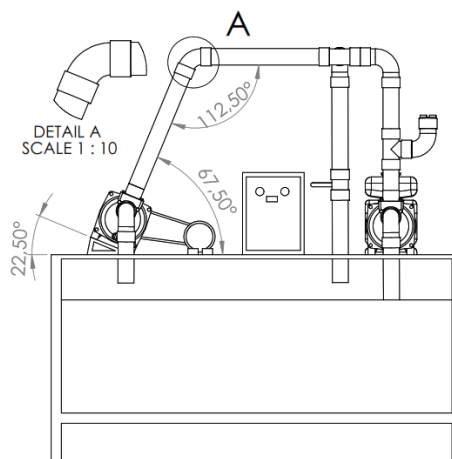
Pipe Installation Angle Entry PATs (SMP) 67.50°
